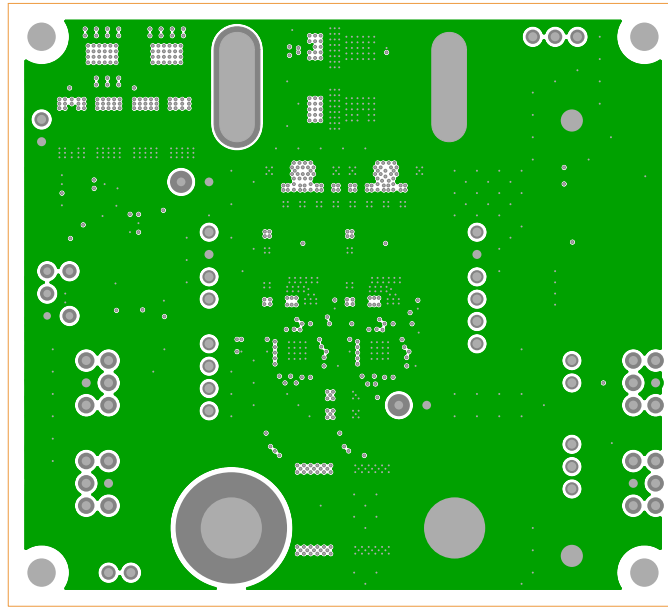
PCB - Inner Layer - Layer 2 (Top View)
